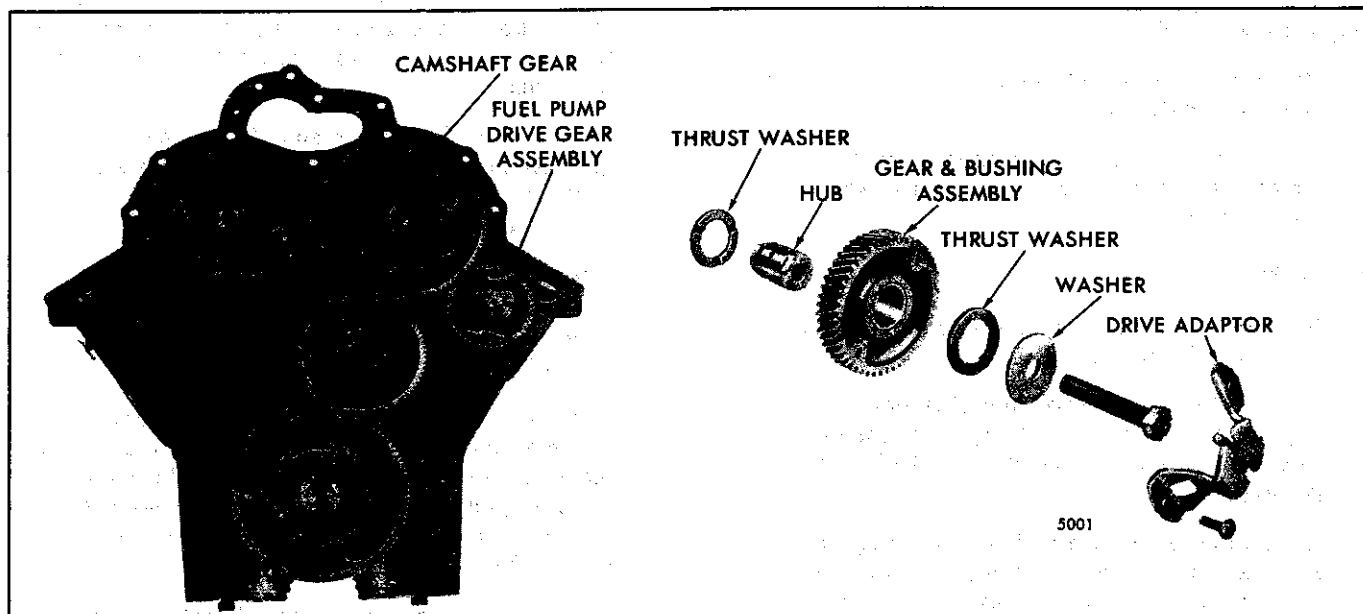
Typical Fuel Pump Drive Gear Mounting and Details (V-Type Engine)
